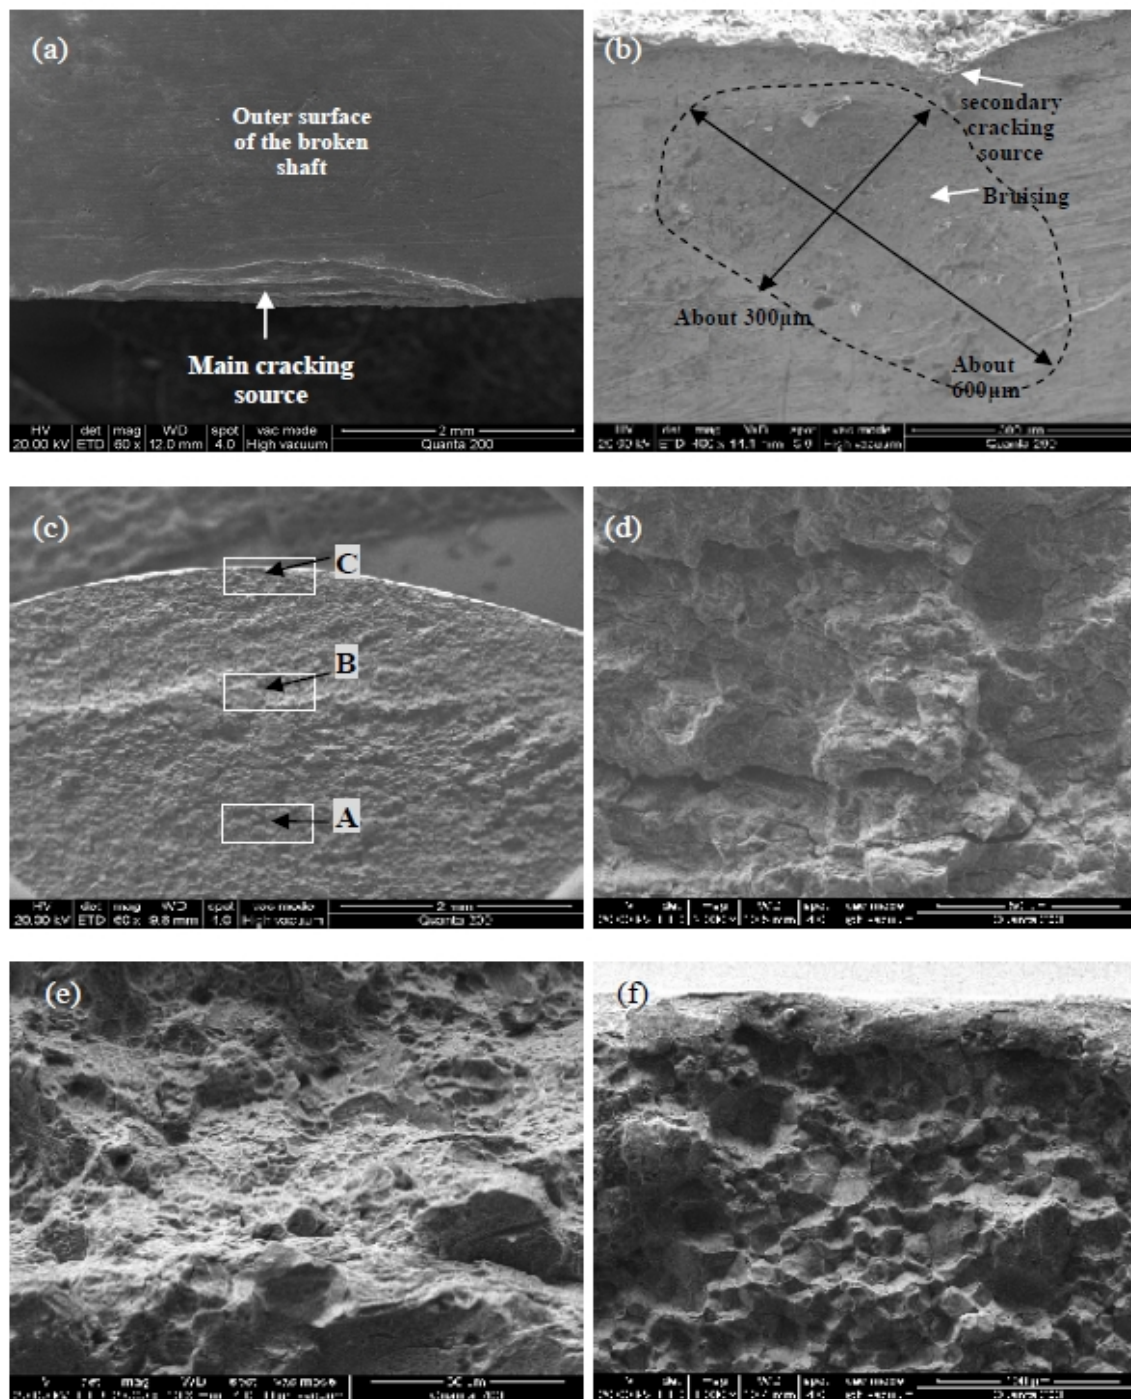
Microscopic morphology of broken shaft fracture. (a) Main crack source area shown in figure 2; (b) Outer surface close to secondary crack source; (c) Near termination zone shown in figure 2; (d) Area A in (c) (fatigue striation); (e) Area B in (c) (dimple); (f) Area C in (c) (brittle intercrystalline fracture in rock candy form).
